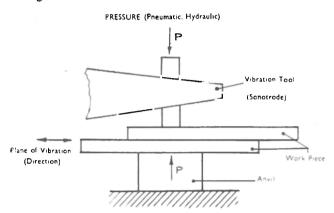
Process of Ultrasonic Welding (Schematic).
